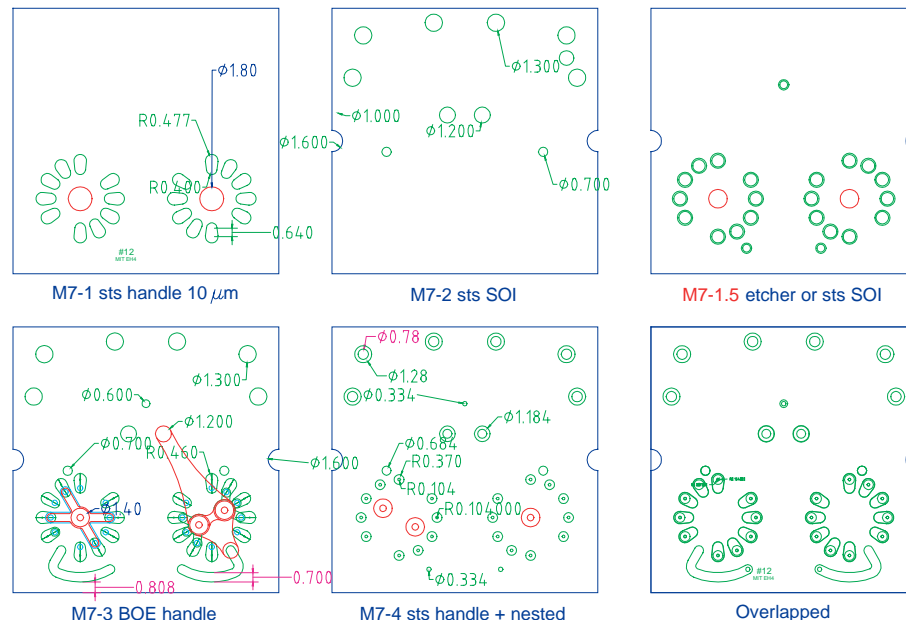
Layer 7 masks. MHT subcomponents with 1, 2 and 10 valve devices.
